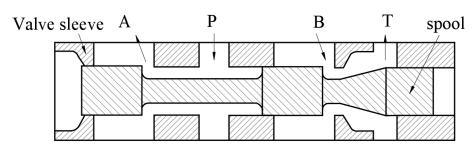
Conventional valve sleeve, with the spool valve machined into a conical surface.
